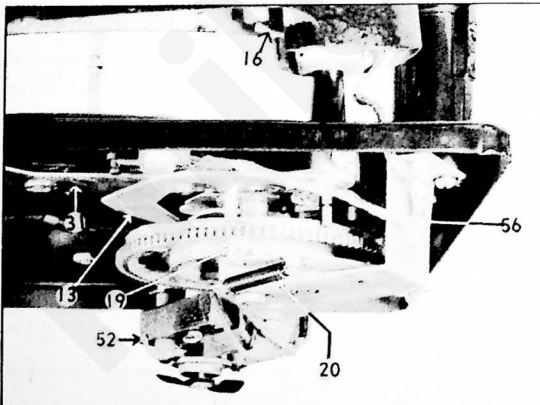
VIEW LOOKING AT RIGHT SIDE
